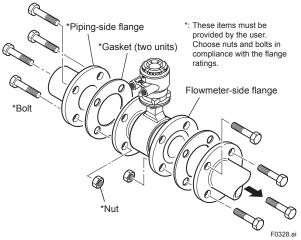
Mounting Procedure for Flange Type (sizes: 2.5 to 500 mm (0.1 to 20 in.))
